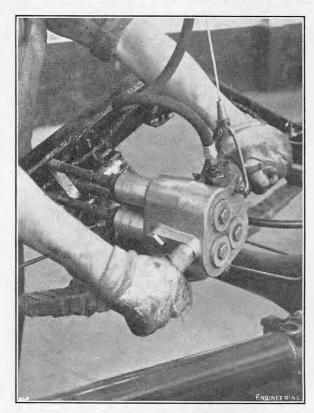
GROUP OF PNEUMATIC MOTORS; DESOUTTER BROS., LTD.
